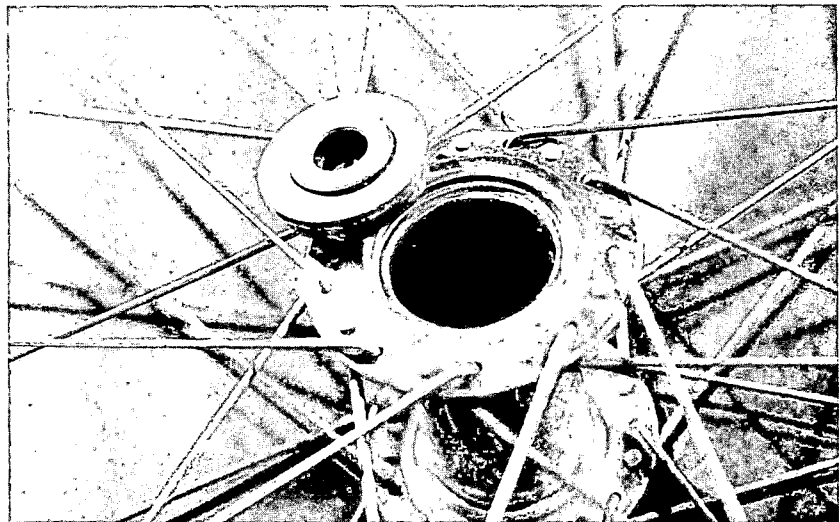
Main wheel hub with bearing removed. The bearing is resting next to the wheel hub.
